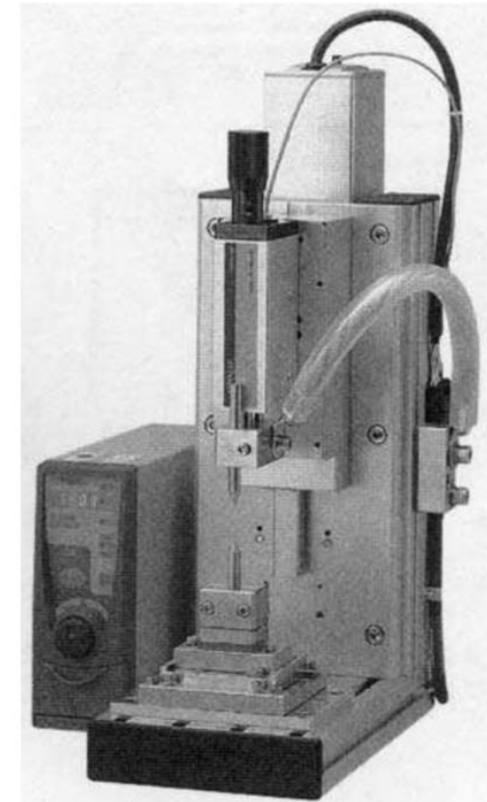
Motor driven welding pressure mechanism [MH-110A].
